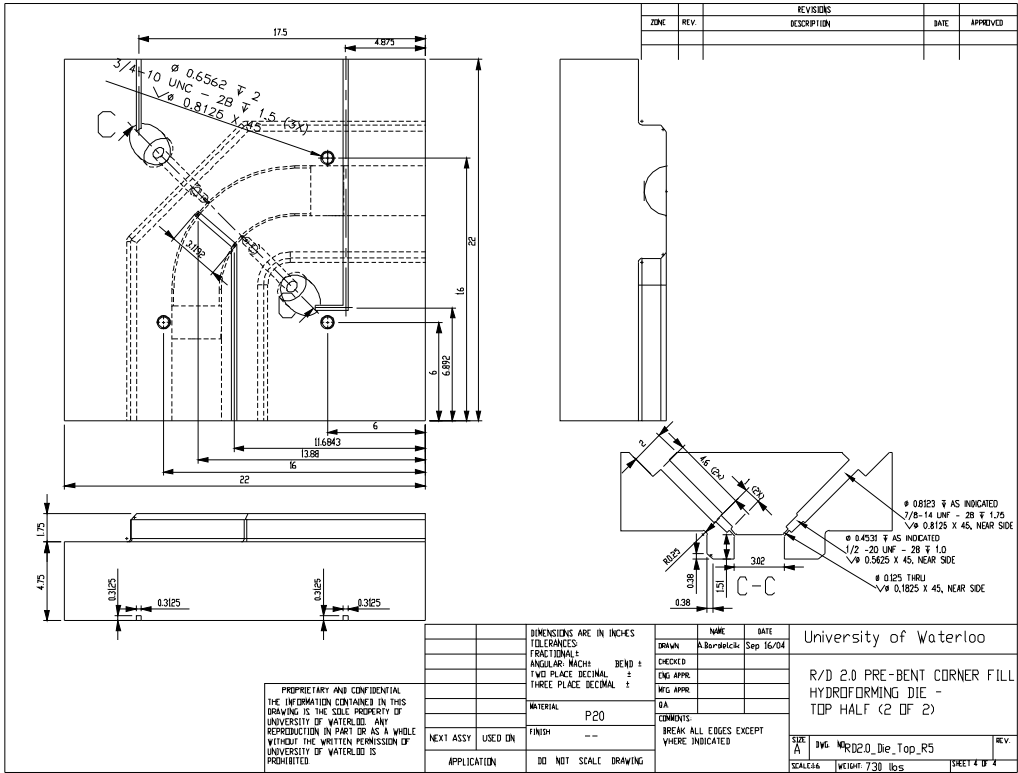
As-built CAD drawing of R/D 2.0 pre-bend hydroforming die (part 2)
